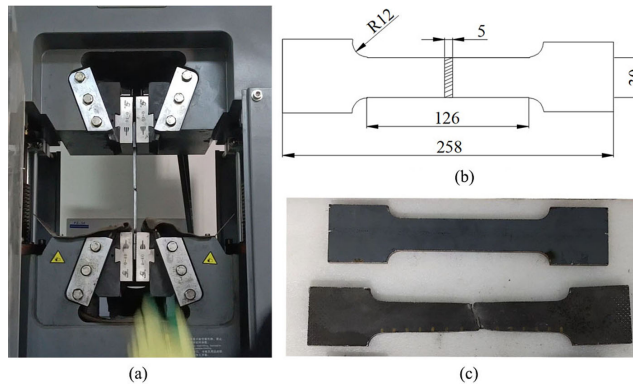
Specimen equipment and post-tension fracture specimens; (a) Universal material testing machine, (b) Specimen size, (c) Fracture specimen after tensile test
